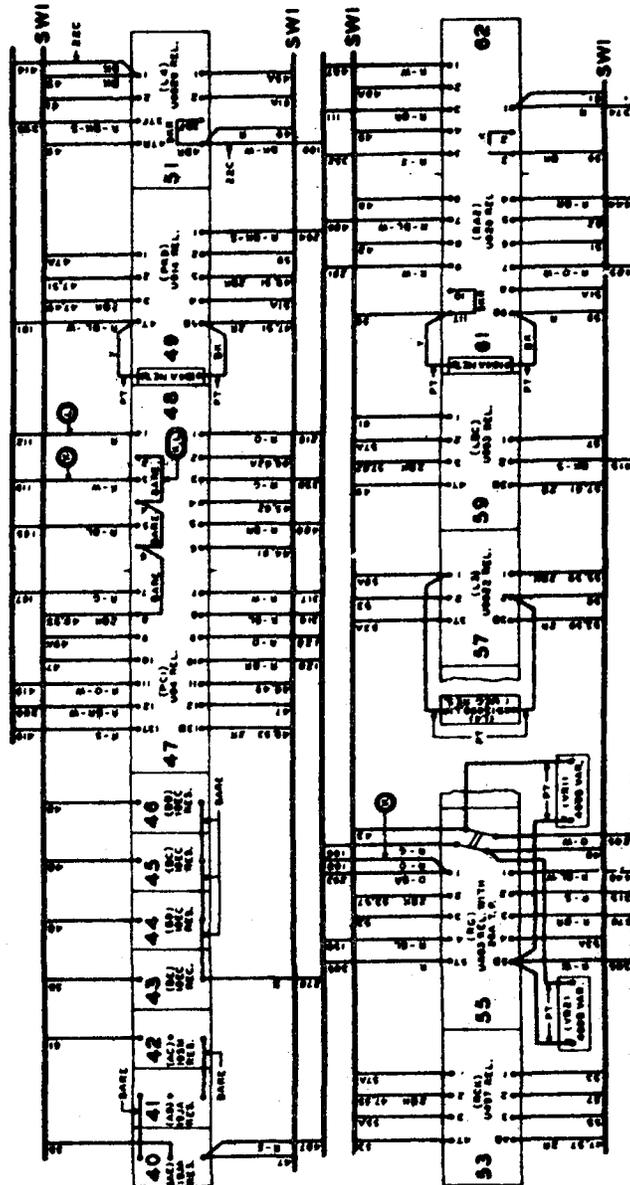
TYPICAL SURFACE WIRING DRAWING (PAR. 2.3)
